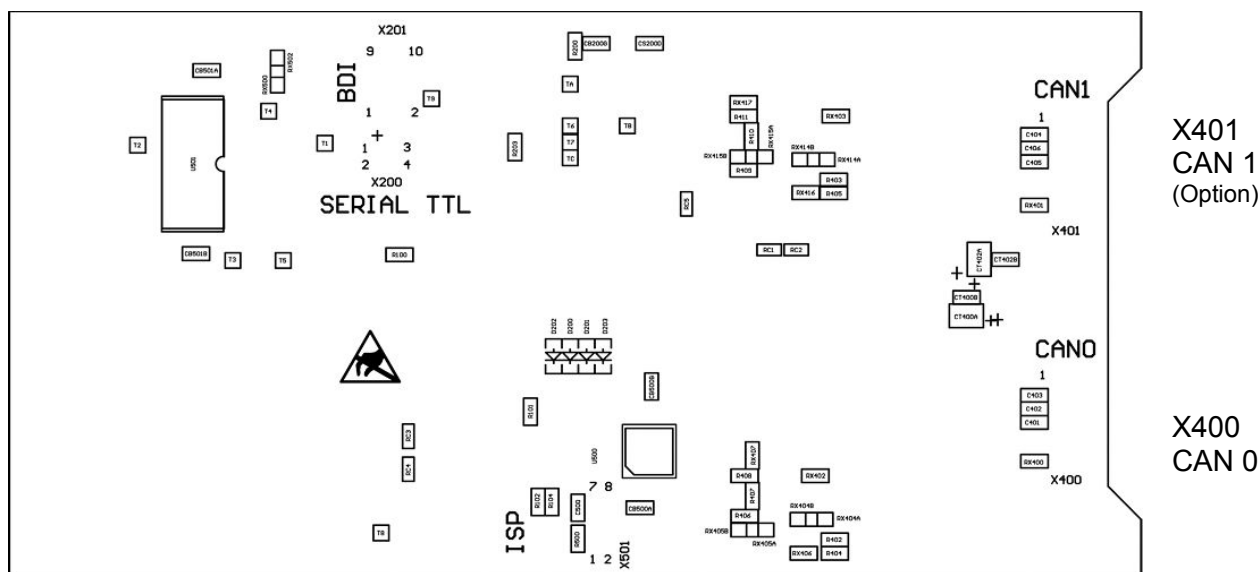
View of PCB layer not facing the carrier board with position of the configuration resistors
